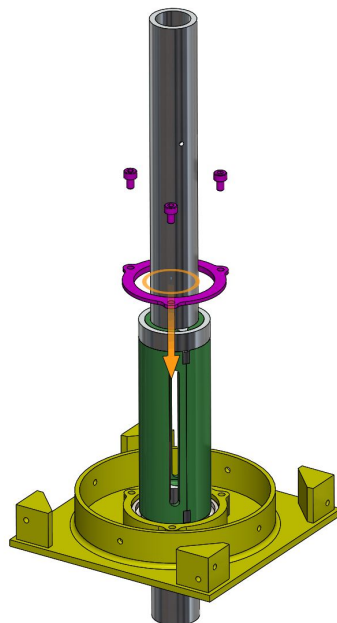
Use three socket head cap screws (item No. 4) to fasten the Bearing Lid (Item No. 3) to the Right Lid.
